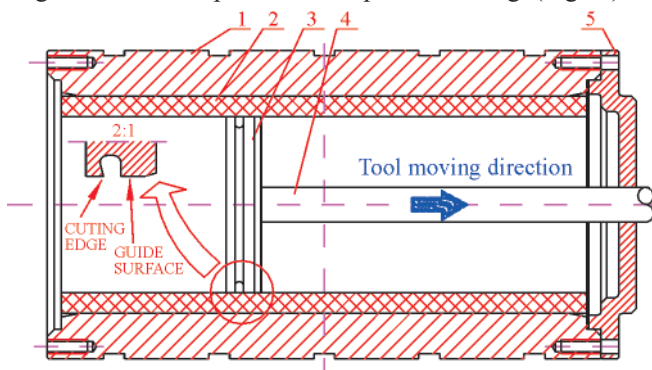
Internal pull-broaching of polymer bearing bush. 1 – steel sleeve, 2 – polymer bearing bush, 3 – form tool, 4 – pulling rod, 5 – cutting disc
